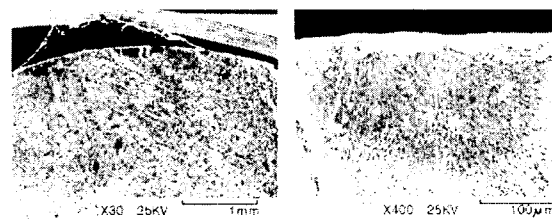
SEM photographs of fracture surface around crack initiation point for specimen SUP7 under 2 stage shot-peened
